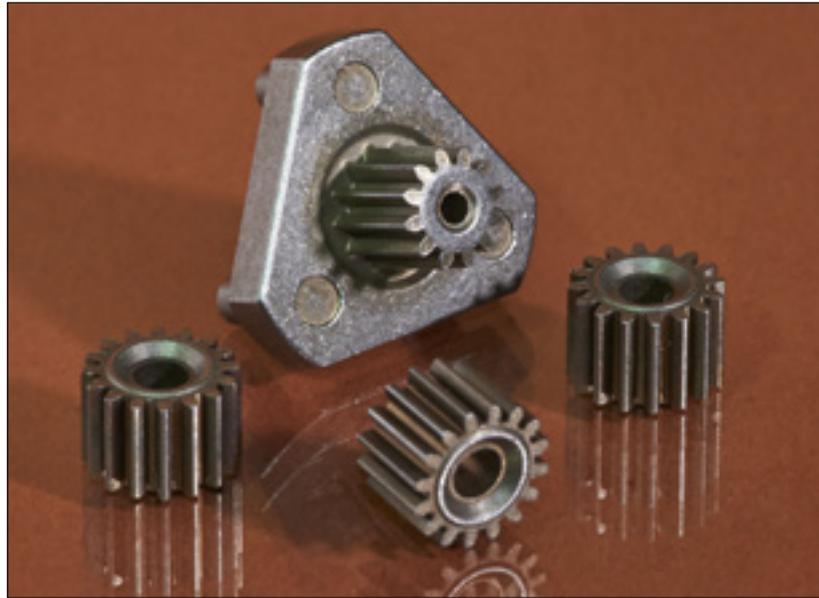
ASCO Sintering Co manufacture this sinter-hardened steel planetary gear system (Courtesy MPIF)
